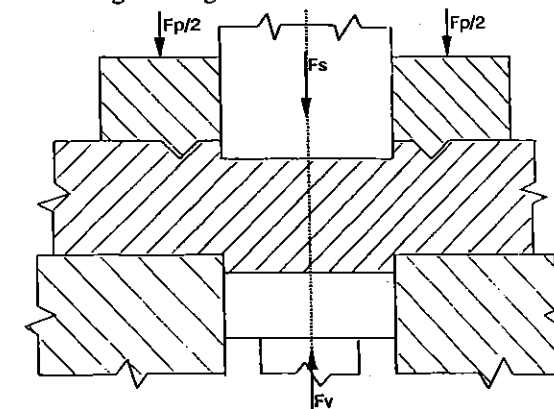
Principle of the precise cutting in the tool with the pressure edge
